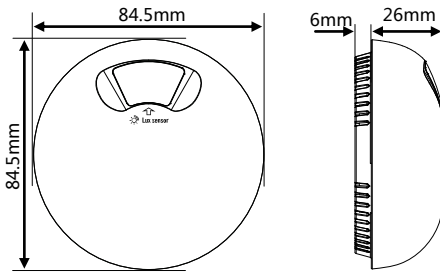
Dimensions - Front View Figure 3. Dimensions - Side View
